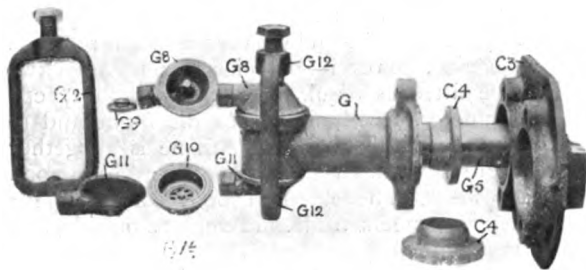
One of the Clarkson feed-pumps, partly removed from its pump-plate, C³, to show the hydraulic joint ring, C⁴; also views of the pump-valves, and of a joint-ring, C⁴, separately.
